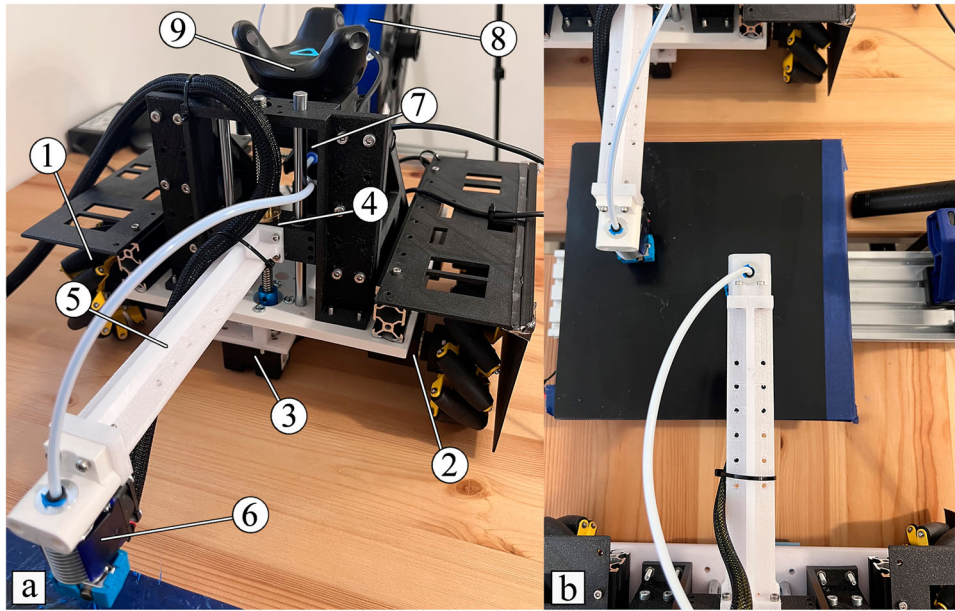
The proposed system. (a) One of the developed mobile robots, showing its main components: (1) mecanum wheel, (2) wheel motor, (3) Z-axis motor, (4) Z-axis structure, (5) printing arm, (6) printhead, (7) extruder, (8) filament spool, and (9) Vive tracker. (b) The two mobile robots arranged in the multi-arm configuration.
